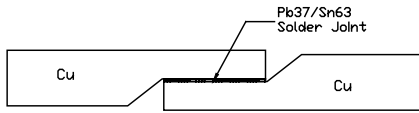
Specimen for fatigue shear testing for Pb37/Sn63 thin layer solder joints.
